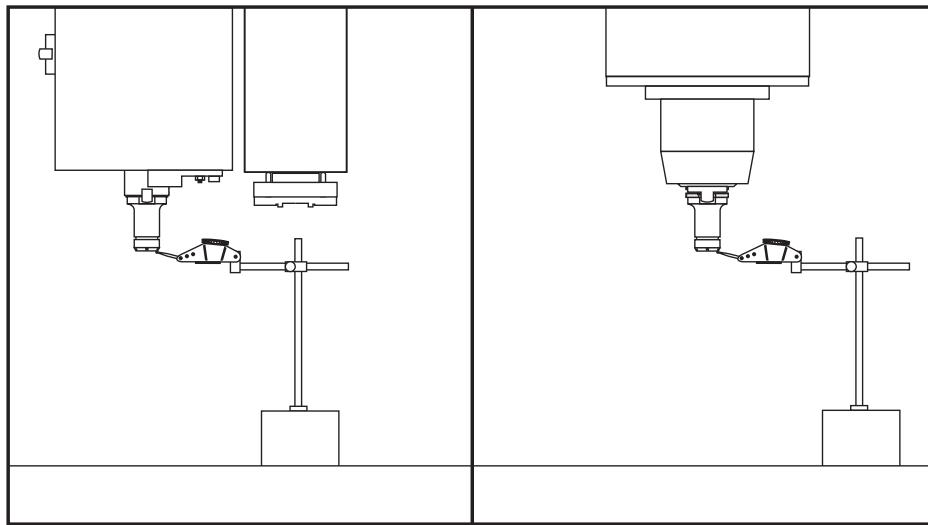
Setting Parameter 64, indicator reference measurement.
